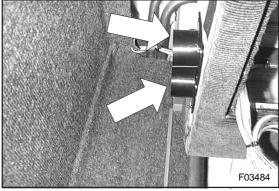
Installation of air hose mounting flanges to parcel rack bulkhead
